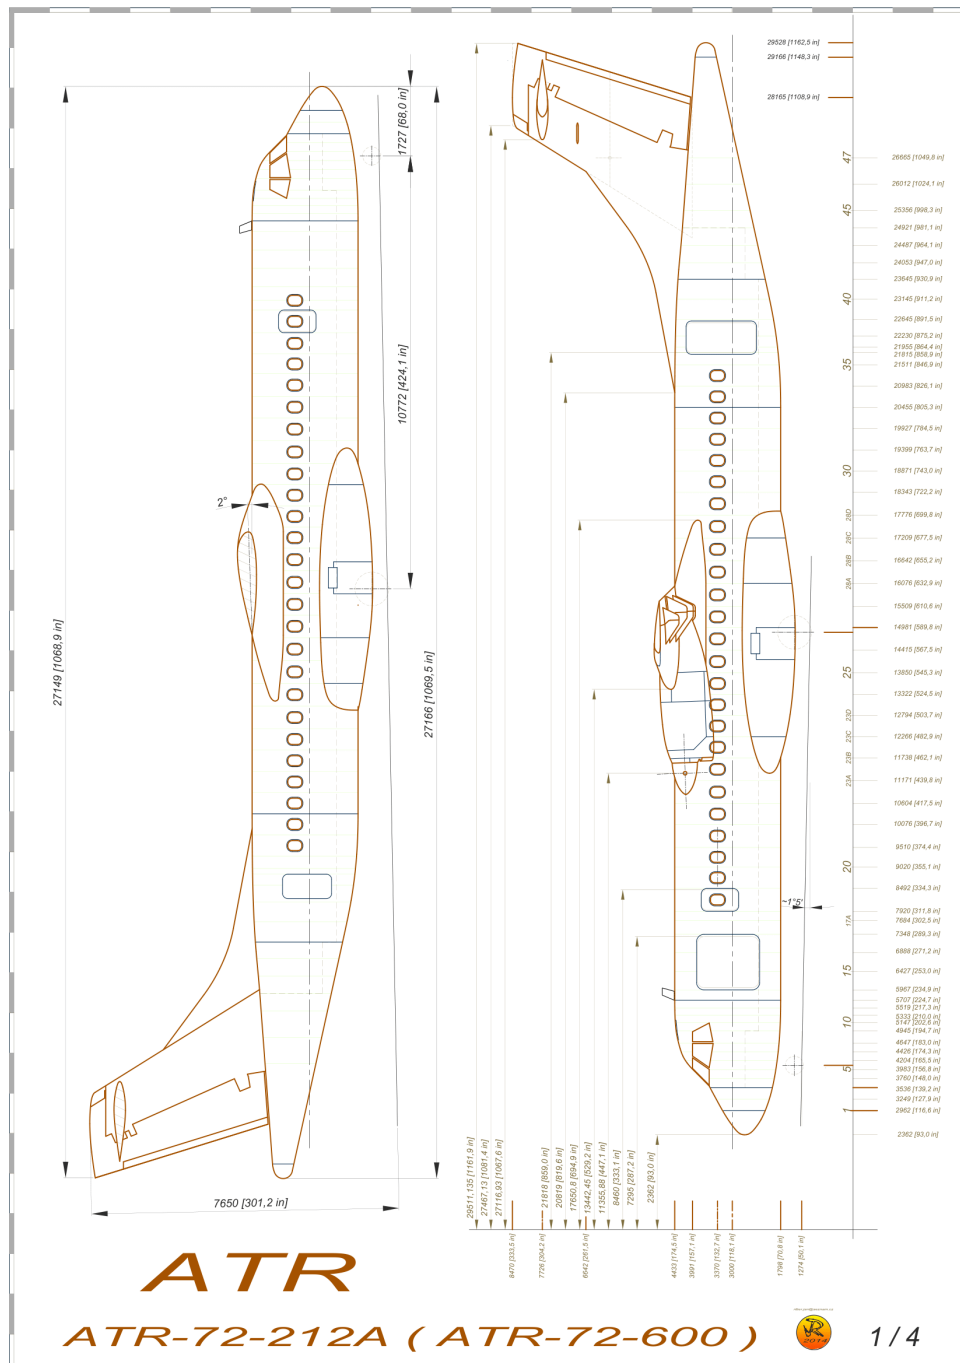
Side view engineering drawing of ATR72-600. Image taken from [3].
